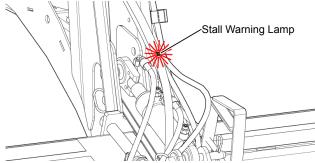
Feed Auger & Center Draper Warning Lamp
